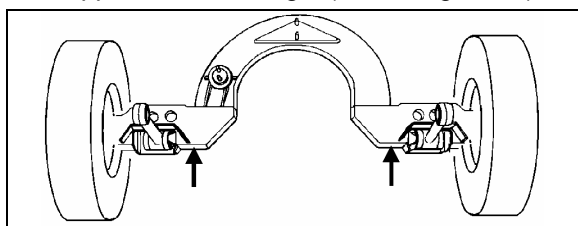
JACKING POINTS ON TAG AXLE 11023
